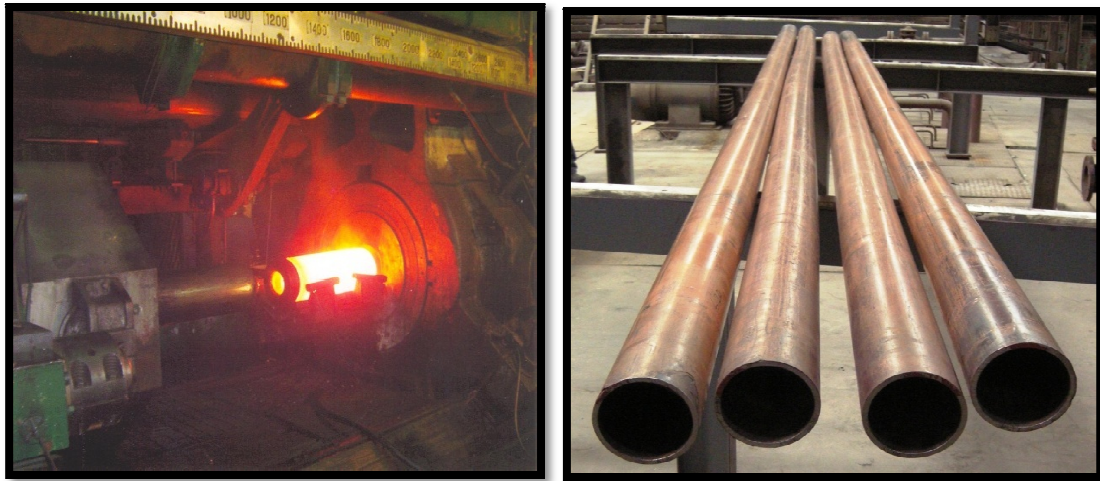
(a) Horizontal hot extrusion press (b) Hot extruded Zr-2.5Nb alloy blanks
